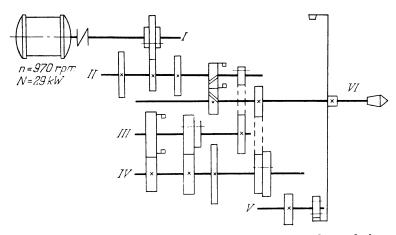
Kinematic diagram of the spindle drive of a heavy lathe
